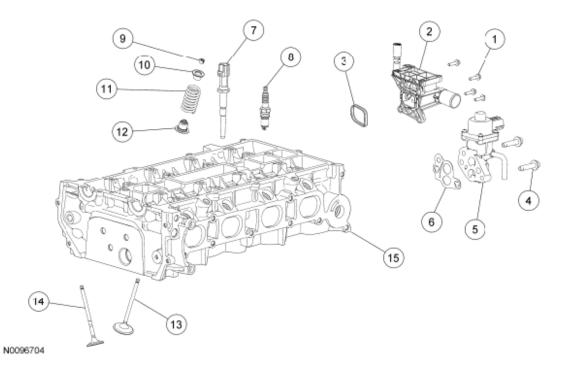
Exploded View Of Cylinder Head Courtesy of FORD MOTOR CO.
